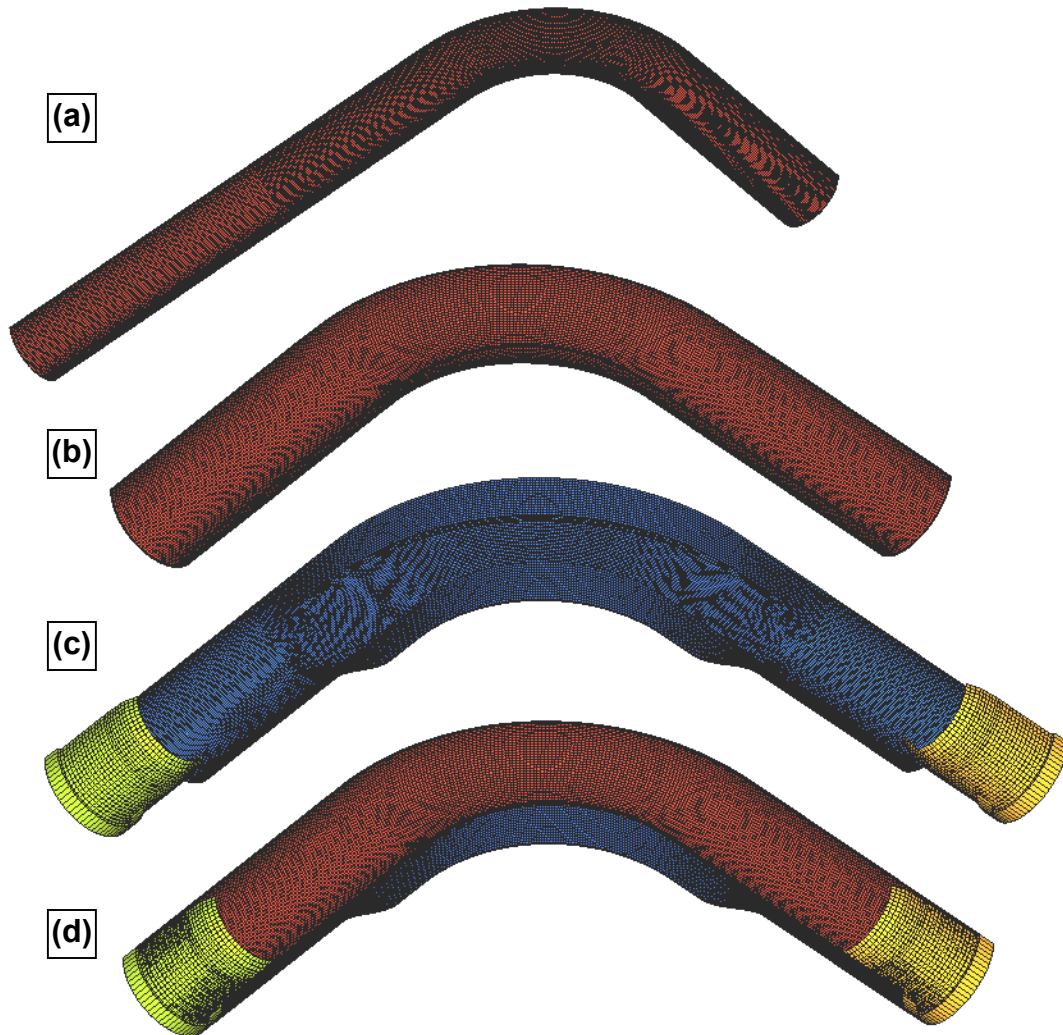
(a) tube after springback; (b) trimmed tube before die closure; (c) hydroforming die and end-feed plugs; (d) tube after die closure and before tube hydroforming
